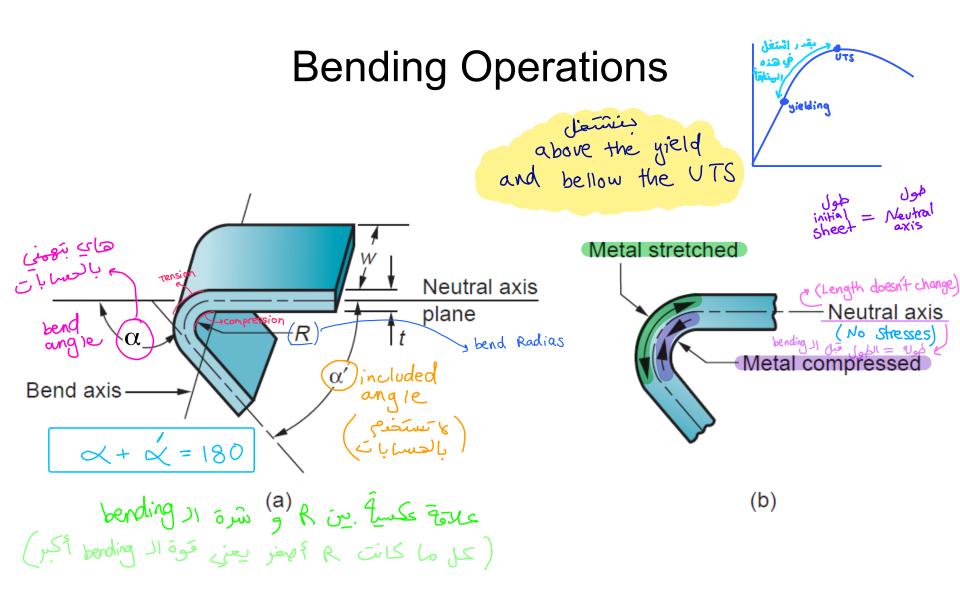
(a) Bending of sheet metal; (b) both compression and tensile 21 elongation of the metal occur in bending.
